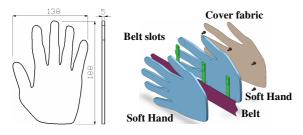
Left: Soft Hand dimensions. Right: sandwiched structure of Soft Hands.
